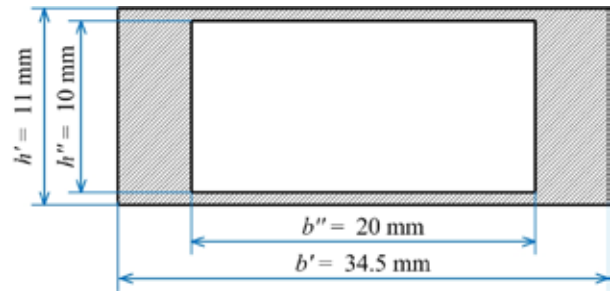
Cross section dimensions of the primary winding conductor for the furnace transformer
